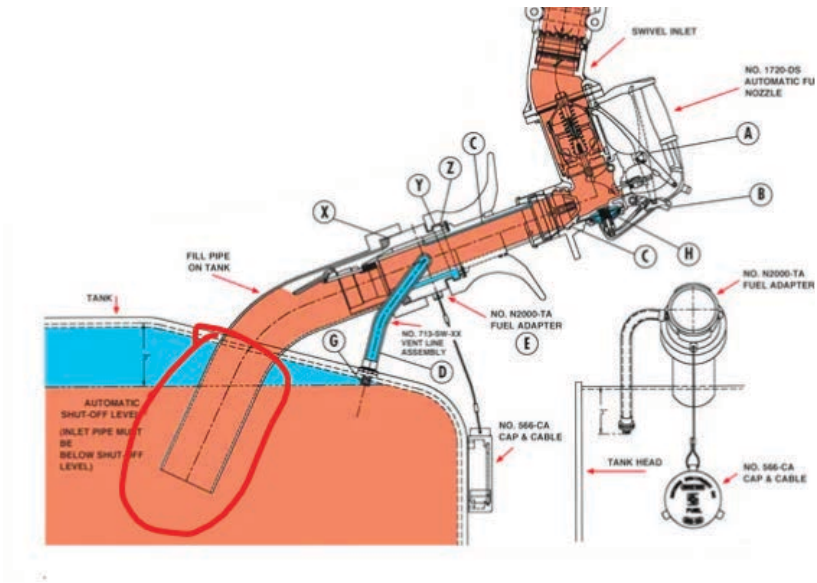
Fuel Tank Filler Neck Layout for Vacuum Nozzle
